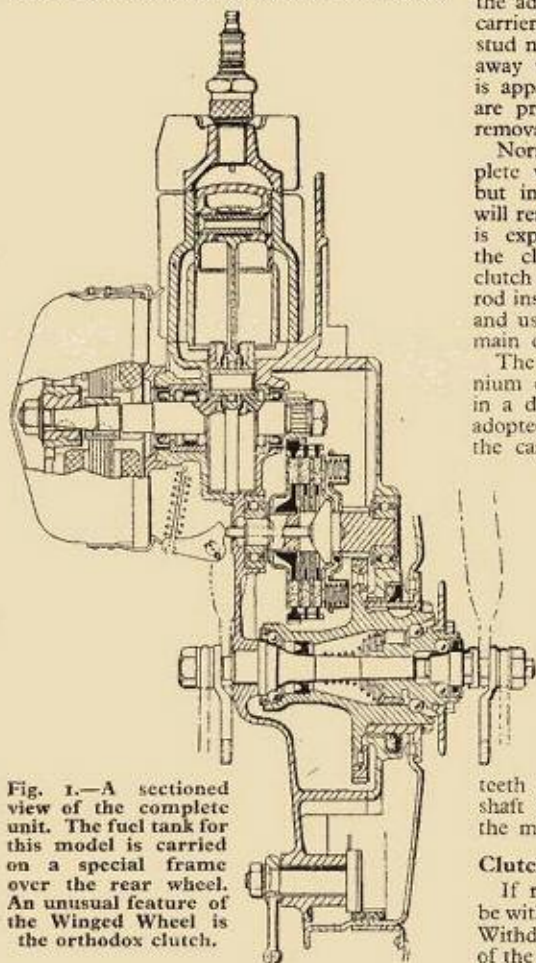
A sectioned view of the complete unit. The fuel tank for this model is carried on a special frame over the rear wheel. An unusual feature of the Winged Wheel is the orthodox clutch.
